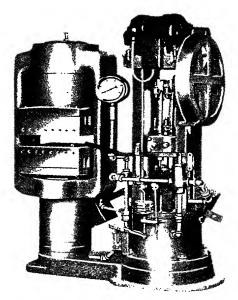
Rodless-type hand-molding press with individual motor, pump, and adjustable accumulator.
